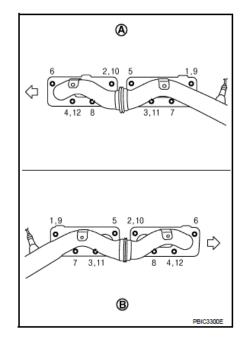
Identifying Exhaust Manifold Nuts Loosening Sequence (Left Bank) Courtesy of NISSAN MOTOR CO., U.S.A.
